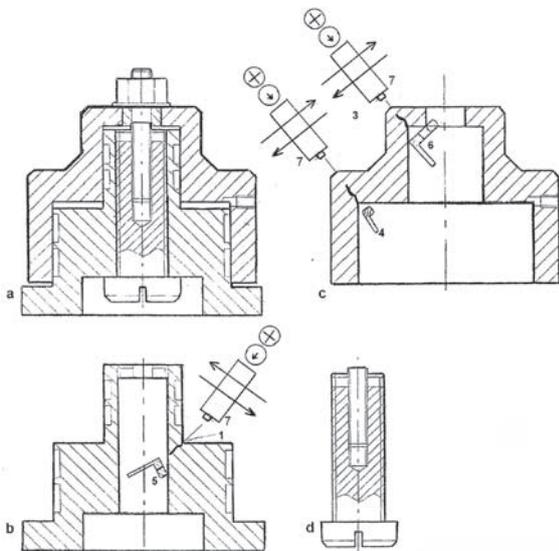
Test bench for bolts of nuclear reactors: (a) total view; (b) plunger; (c) body; (d) bolt being tested; (2,3) cracks in the plunger and body appearing in testing of high-strength bolts; (4) one; (5) two; (6) three-section solid-state radiation transducers; (7) radiation source (isotope, R - tube).
